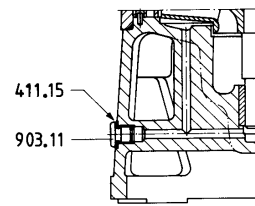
Sizes LV 25/32/40, lubrication bore hole for sleeve bearings, suction side with screw plugs
